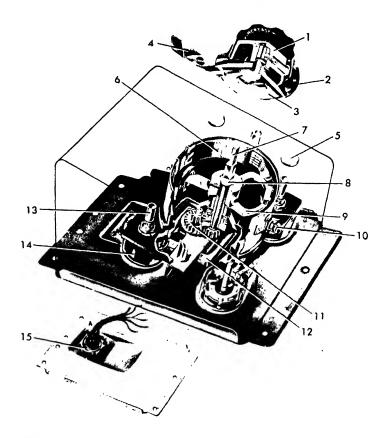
A cutaway view of a turbo-boost selector. (1) Knob; (2) dial; (3) dial-stop plate; (4) latch; (5) snap plug; (6) selector potentiometer winding; (7) Vernier-drive shaft; (8) wiper shaft; (9) selector potentiometer wiper; (10) potentiometer center top; (11) Vernier gears; (12) transformer; (13) guide sleeve; (14) calibrator potentiometer; (15) connector. (Courtesy Minneapolis-Honeywell Regulator Company)
